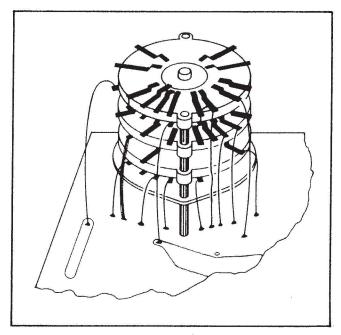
Location of leads that must be removed to remove and replace the VERTICAL CURRENT/DIV switch.
